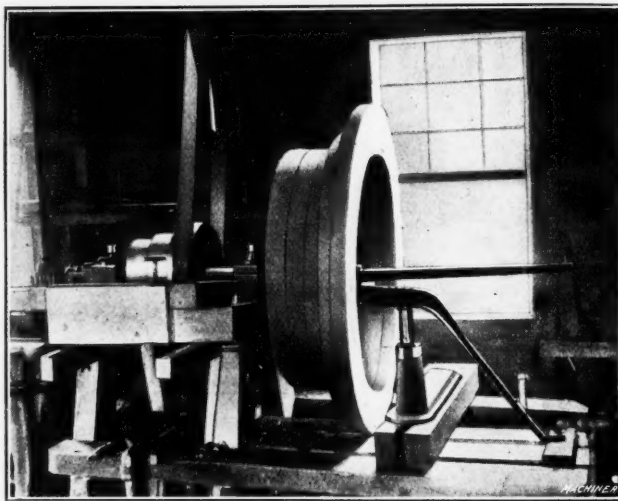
Spinning Lathe with Large Wooden Chuck on Spindle
